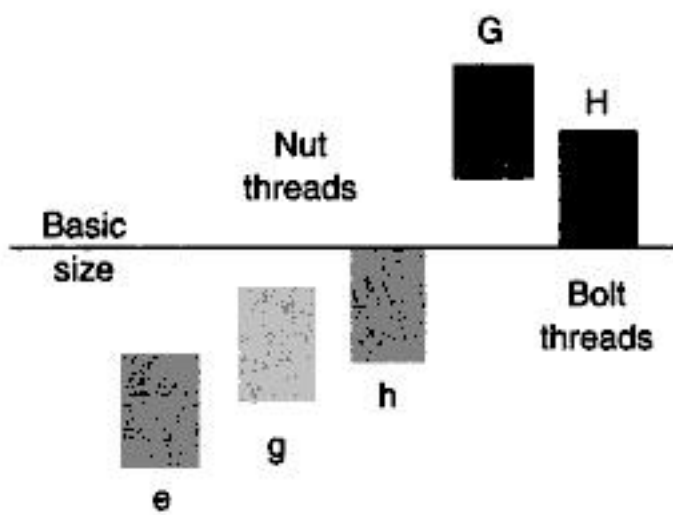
Tolerance position and grading for ISO threads
